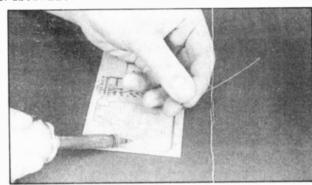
Solder just beginning to melt onto the copper track around the hole of a PCB. When this occurs you know that the joint is hot enough
